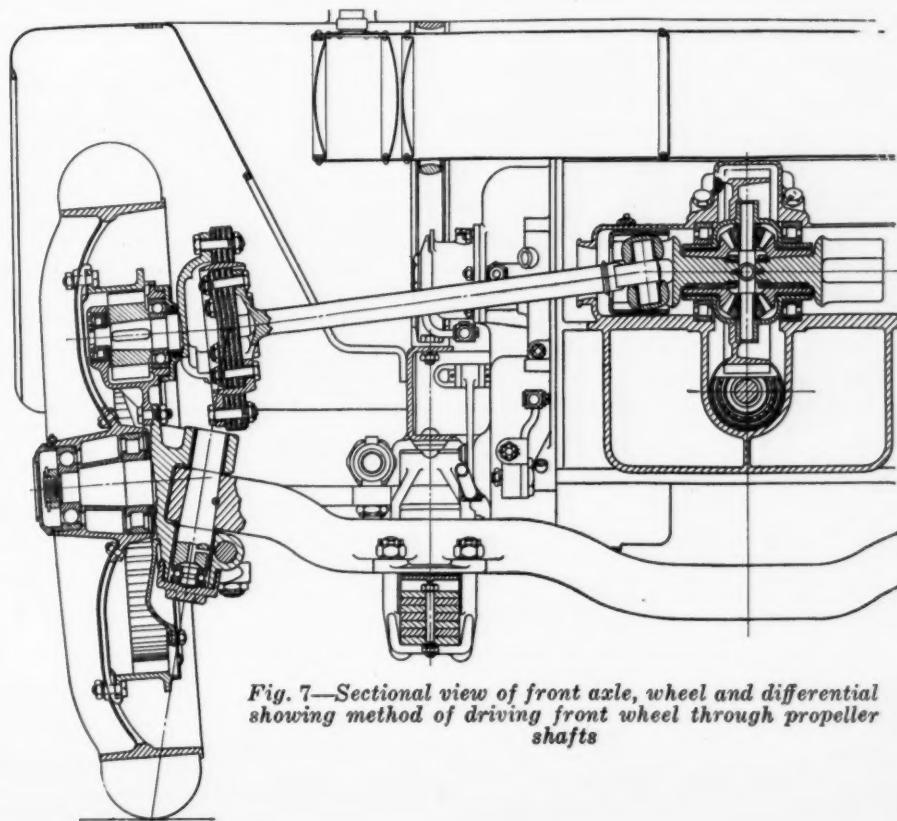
Sectional view of front axle, wheel and differential showing method of driving front wheel through propeller shafts
